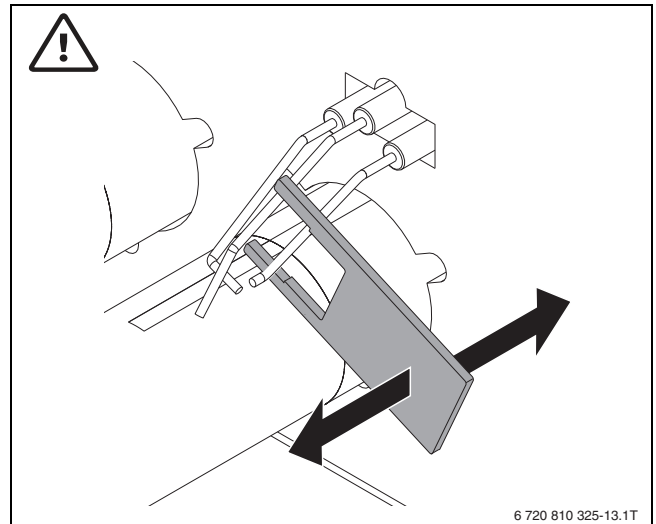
Checking the clearance of the ignition electrode to burner rod
